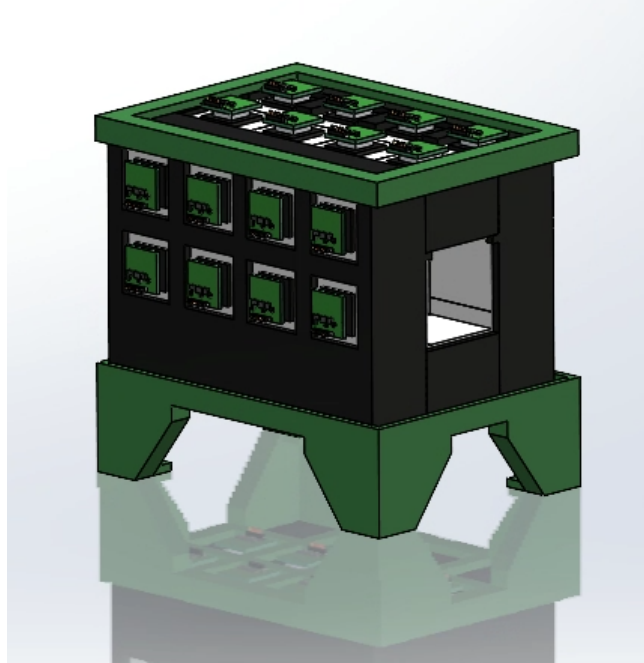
CsI detector assembly and frame modelled with SolidWorks
